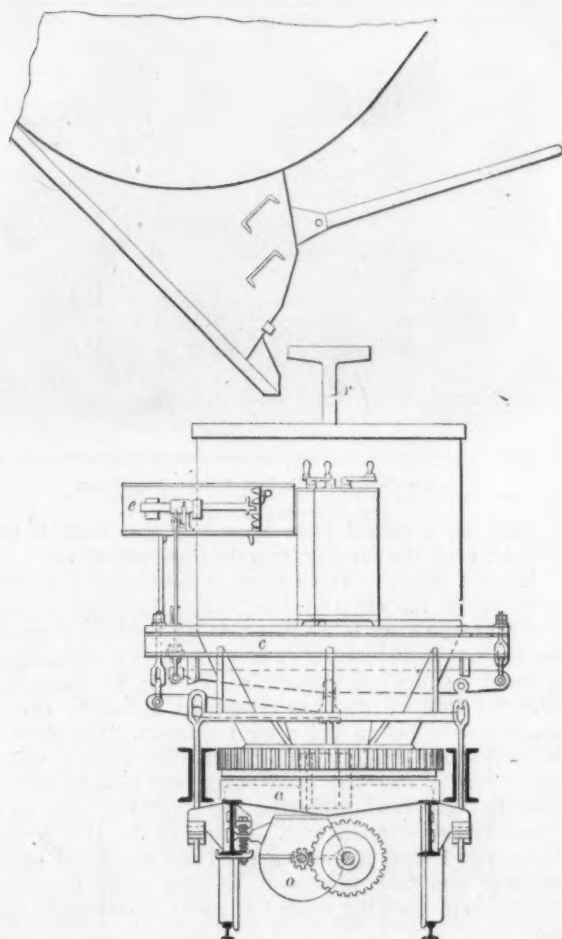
End View of Scale Car Equipped with Drop Bottom Bucket.
